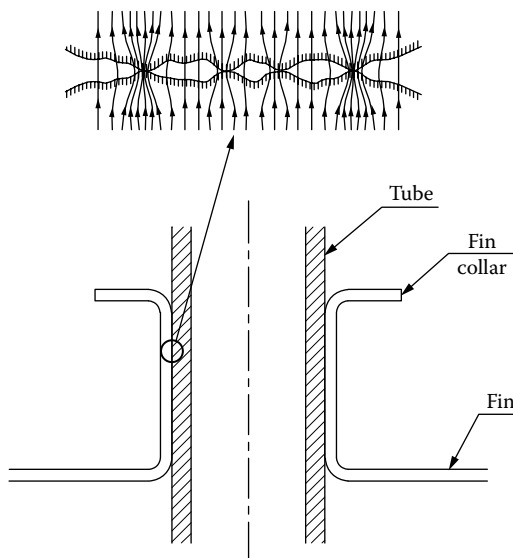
Metal-to-metal contact between the tube and the fin.
